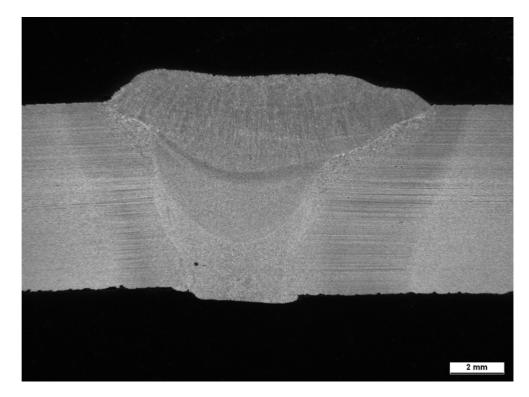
Cross section of test pipe wall (API5LX70) with girth weld
